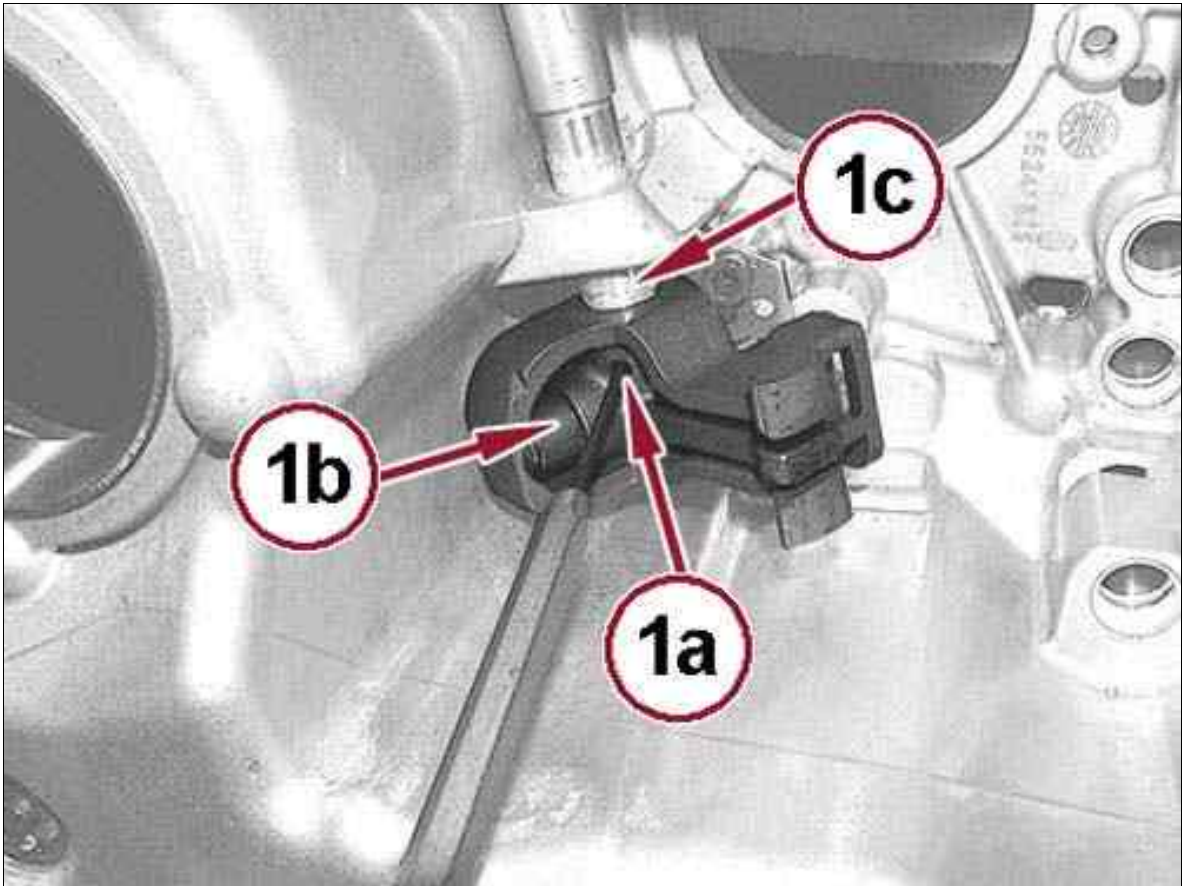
Gear Selector And Engagement Lever, Gear Selector, Engagement Rod Inner Mounting Bracket & Dog
